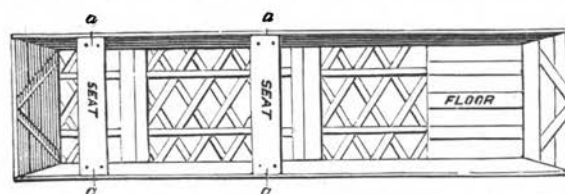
PLAN OF AMERICAN SHOOTING PUNT.
